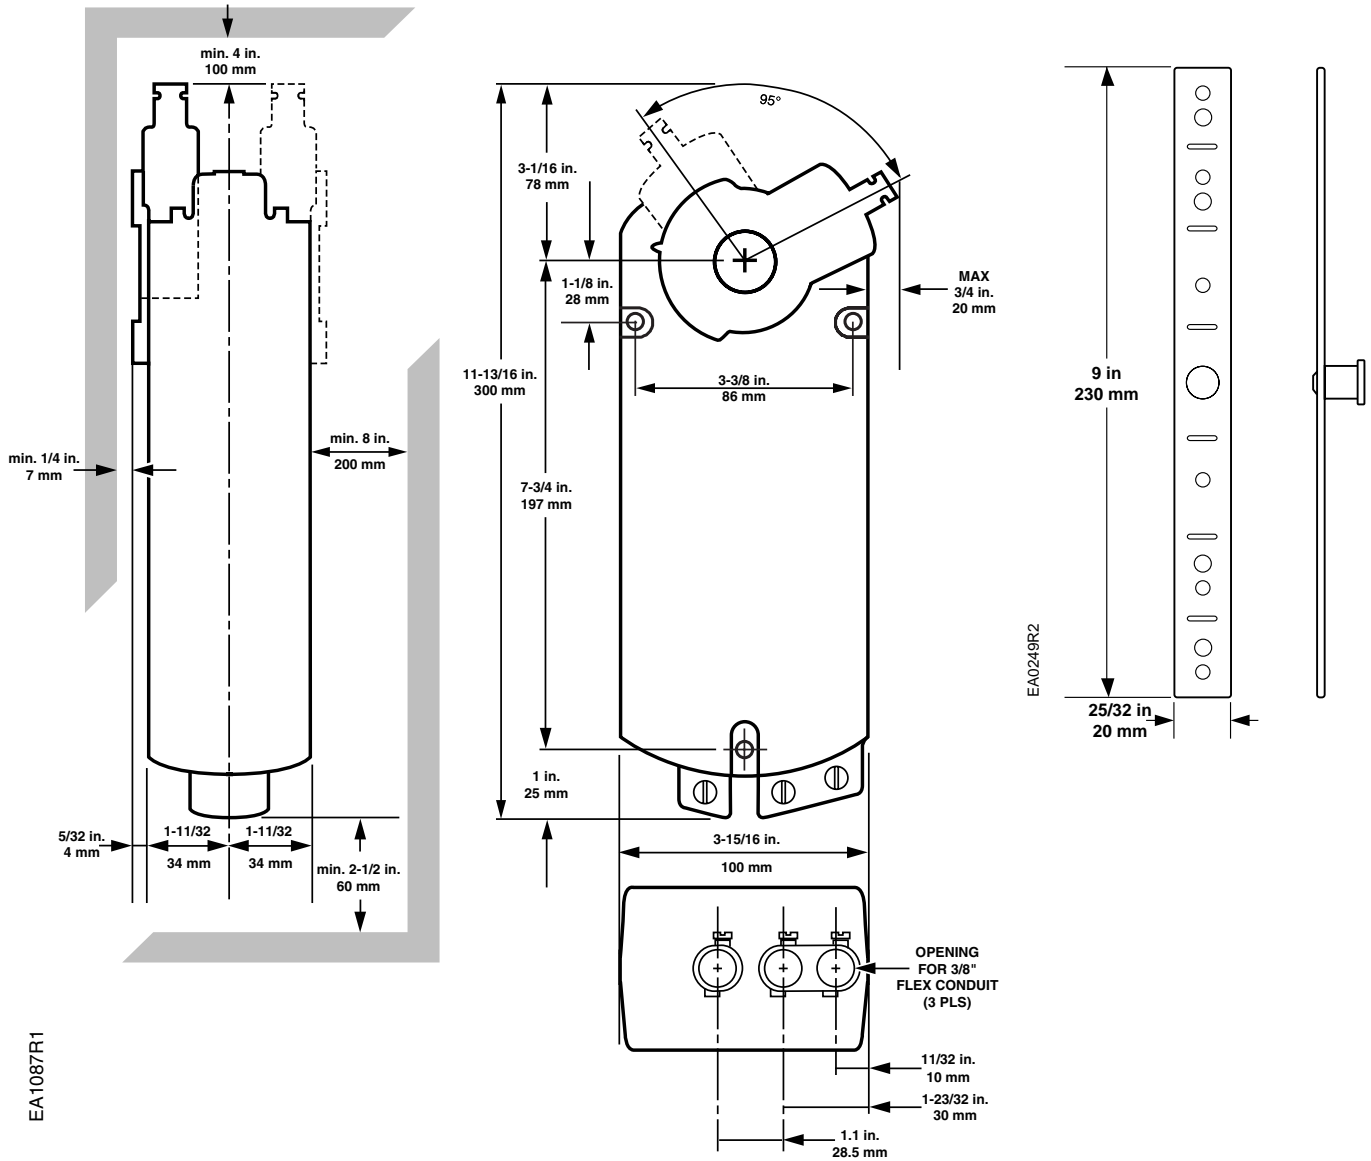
Dimensions of the GCA Actuator and Mounting Bracket.
